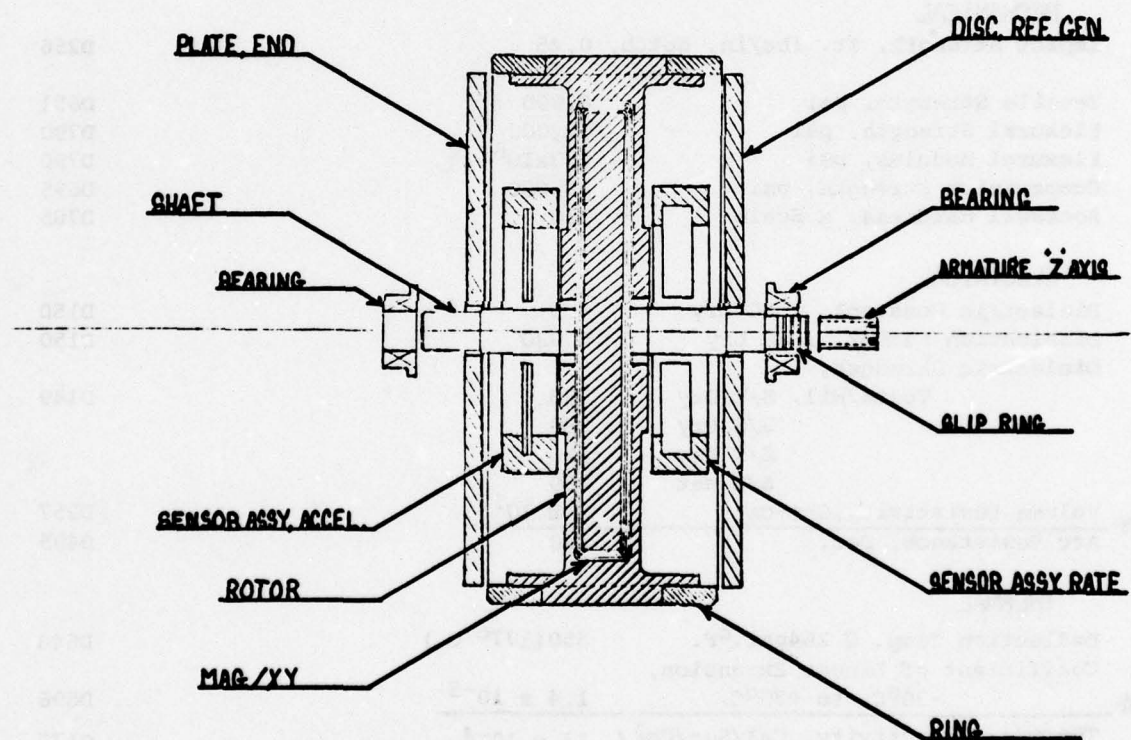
Multi-Sensor Rotor Assembly Molded Configuration.
